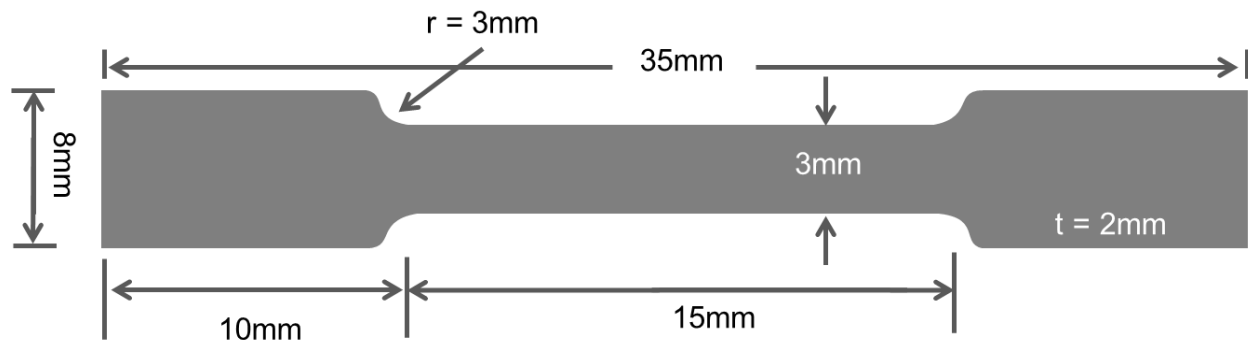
Schematic illustrating sample dimensions for sub-size tensile specimen, based on ASTM E8 standard [80]
